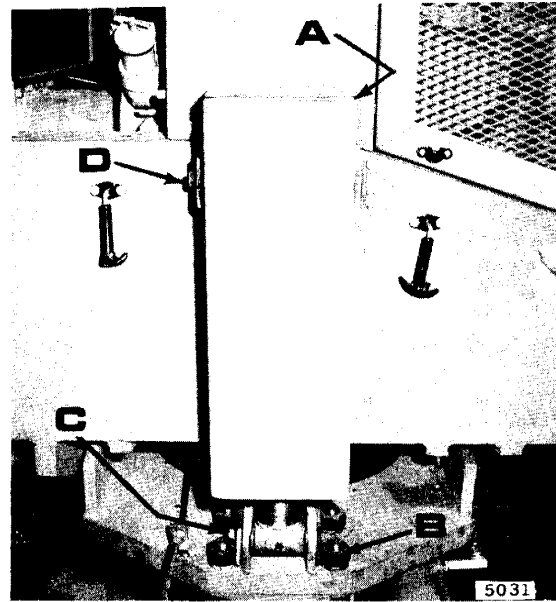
Oscillation Lockout Cylinder Attach Points
